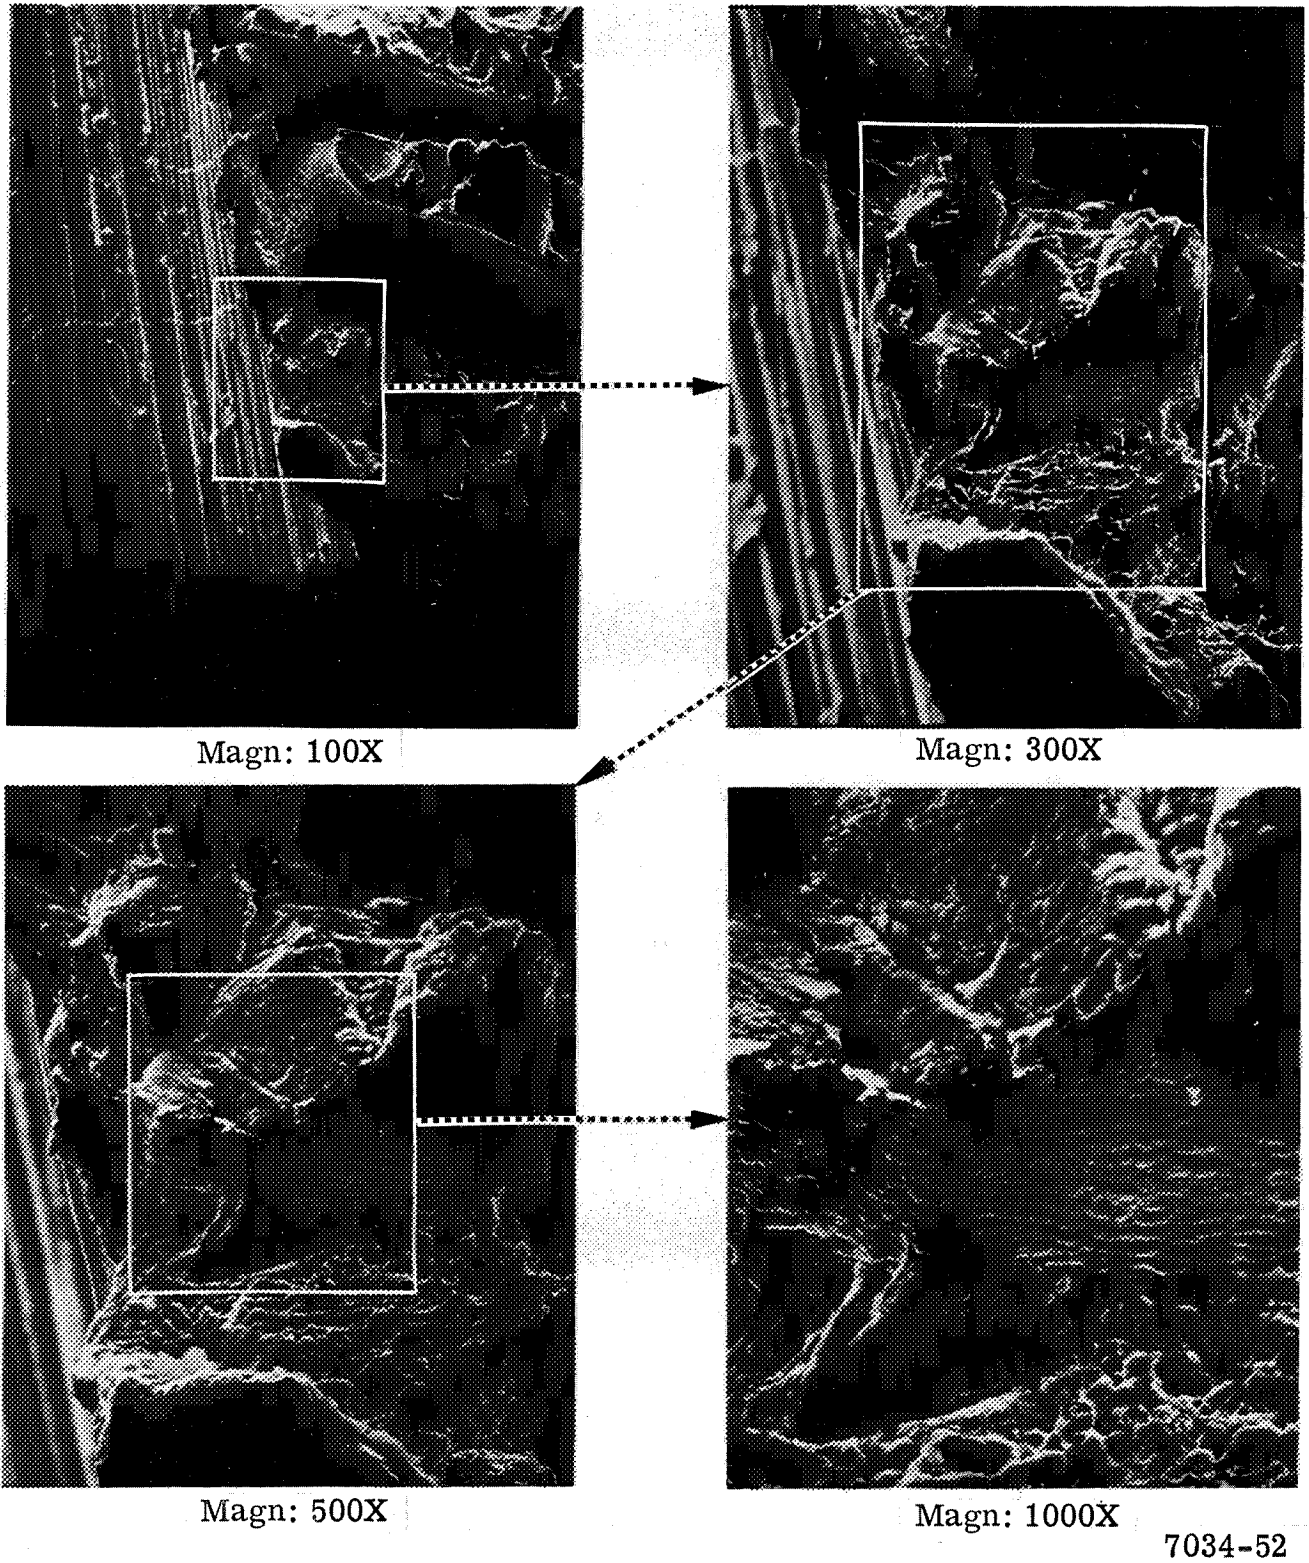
Scanning electron fractographs of transverse failure surfaces of test vane No. 4.
